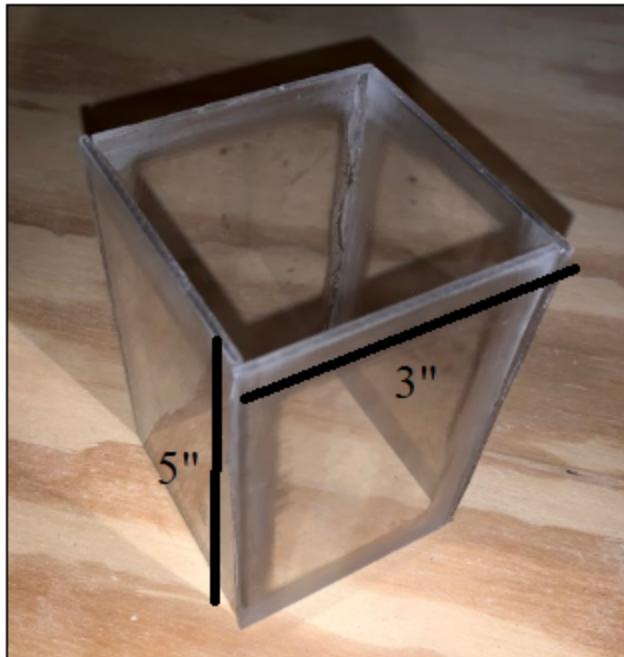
Assembly of 3x5 Inch Rectangular Pieces of Plexiglass
